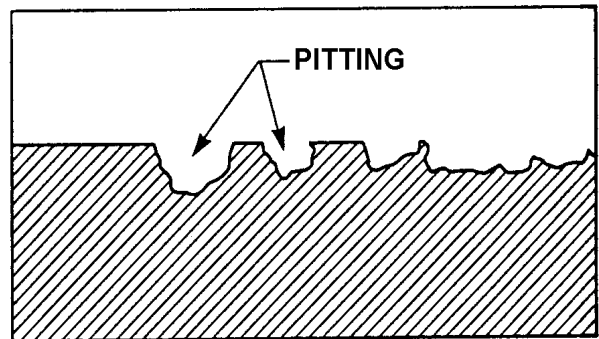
(b). Pitting corrosion (magnified cross section).
